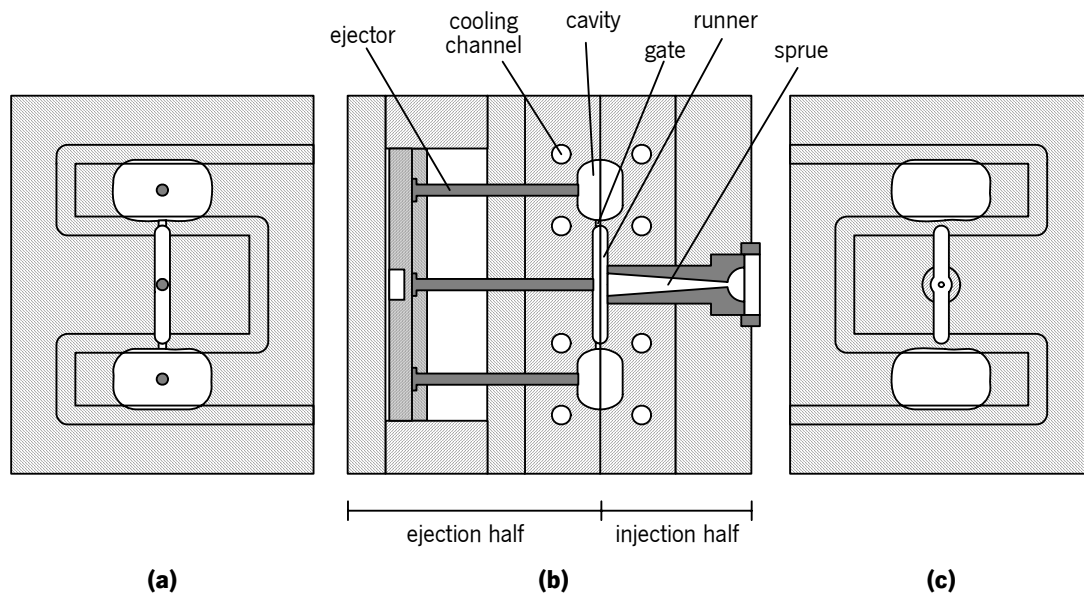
Two-plates tool set with two part cavities, showing the main components in both halves (b) and the surface of the ejection (a) and injection plates (c).
